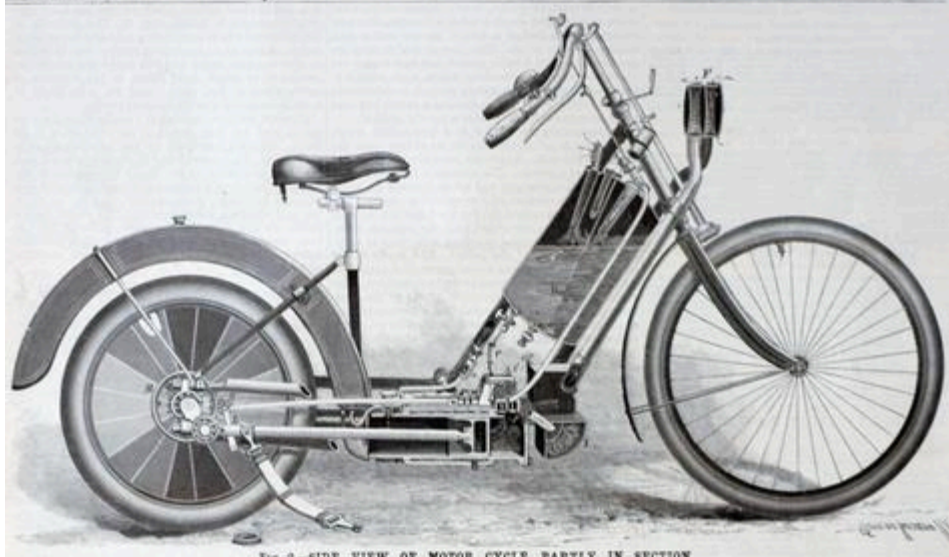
SIDE VIEW OF MOTOR CYCLE, PARTLY IN SECTION.
